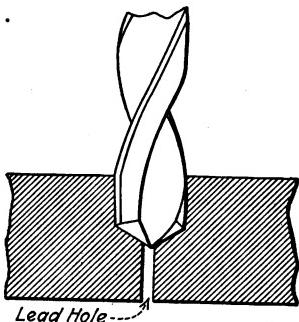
A lead hole made by a smaller drill will guide a larger drill
